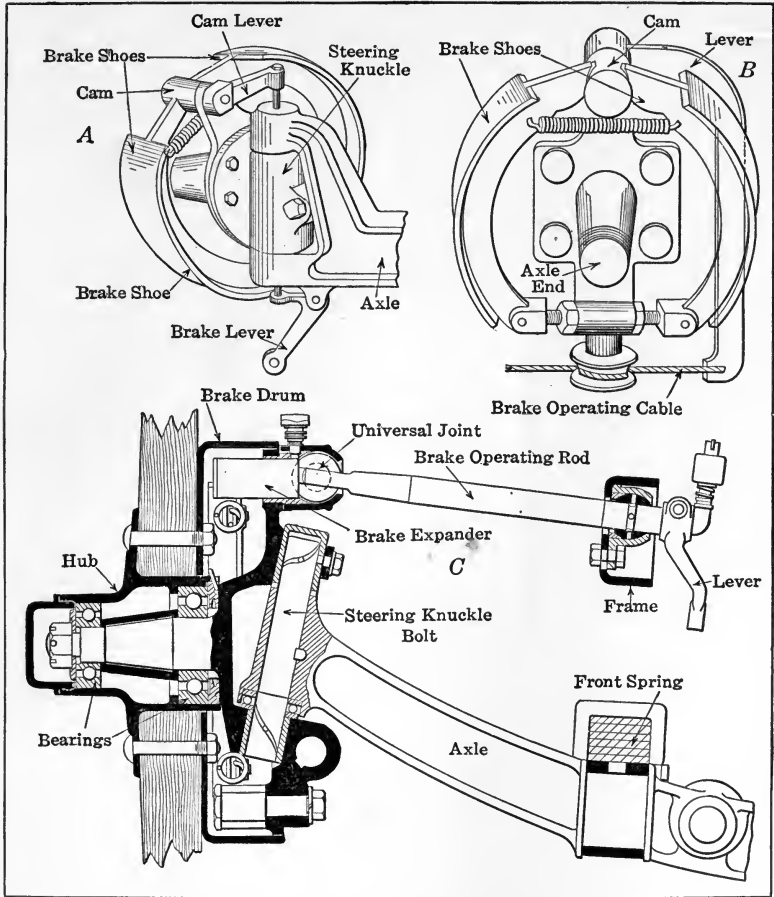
Types of Front-Wheel Brakes that Have Been Used on British Automobiles Showing Novel and Ingenious Methods of Brake Actuation.
